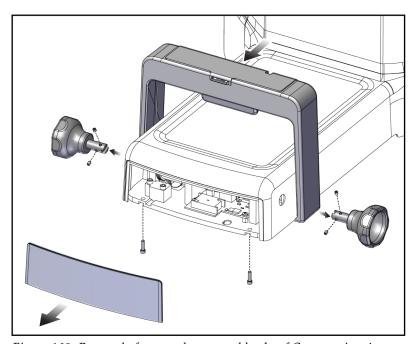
Removal of rear-end cover and knobs of Compression Arm
